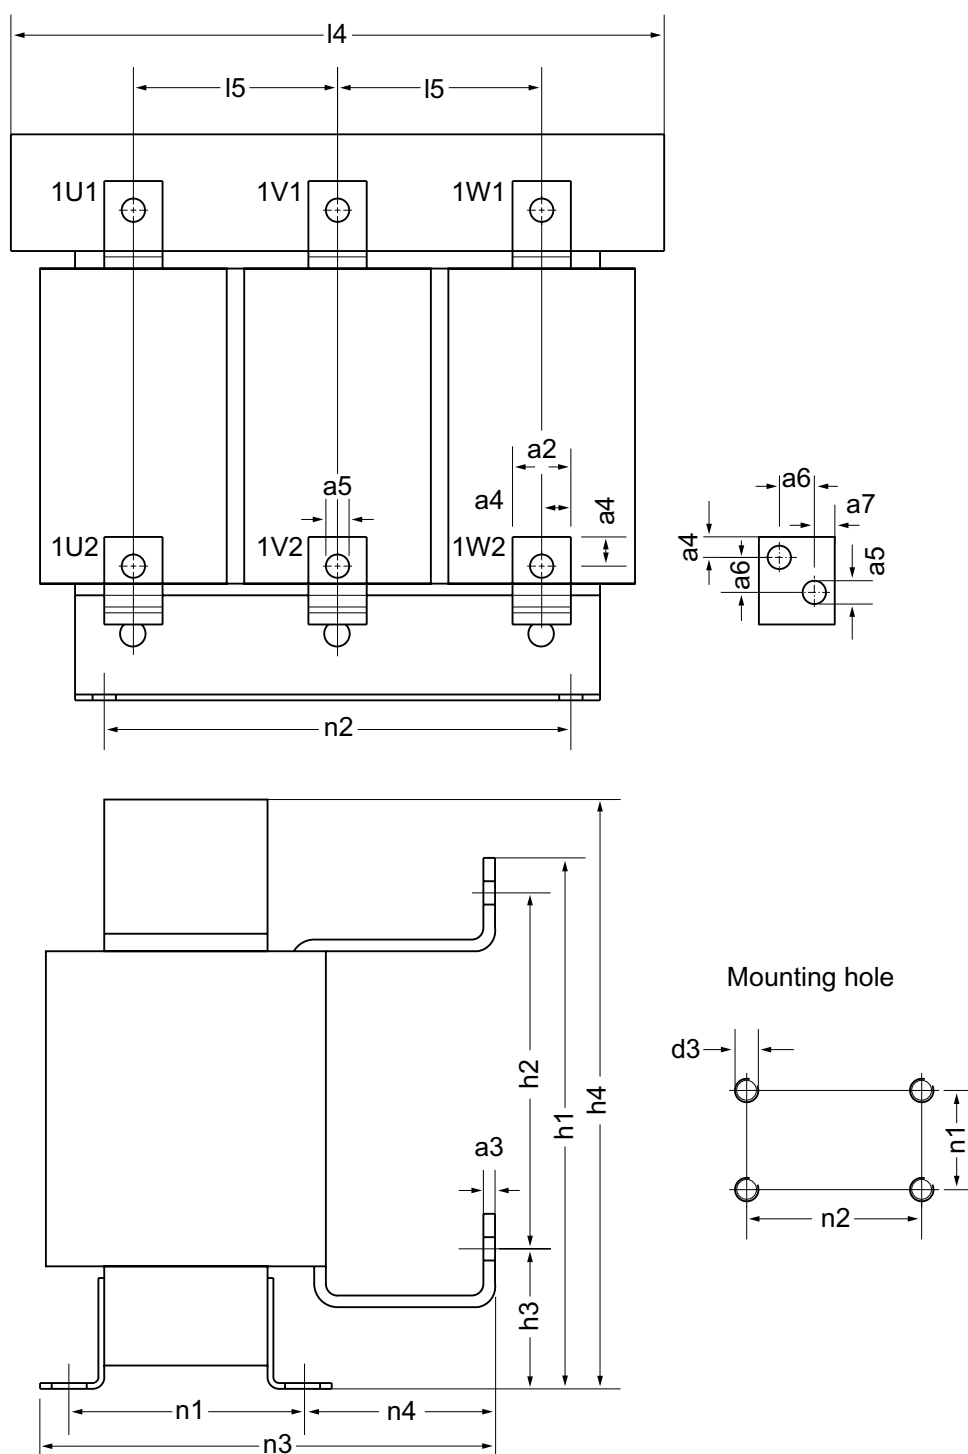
Dimension drawing of line reactors for Basic Line Modules
